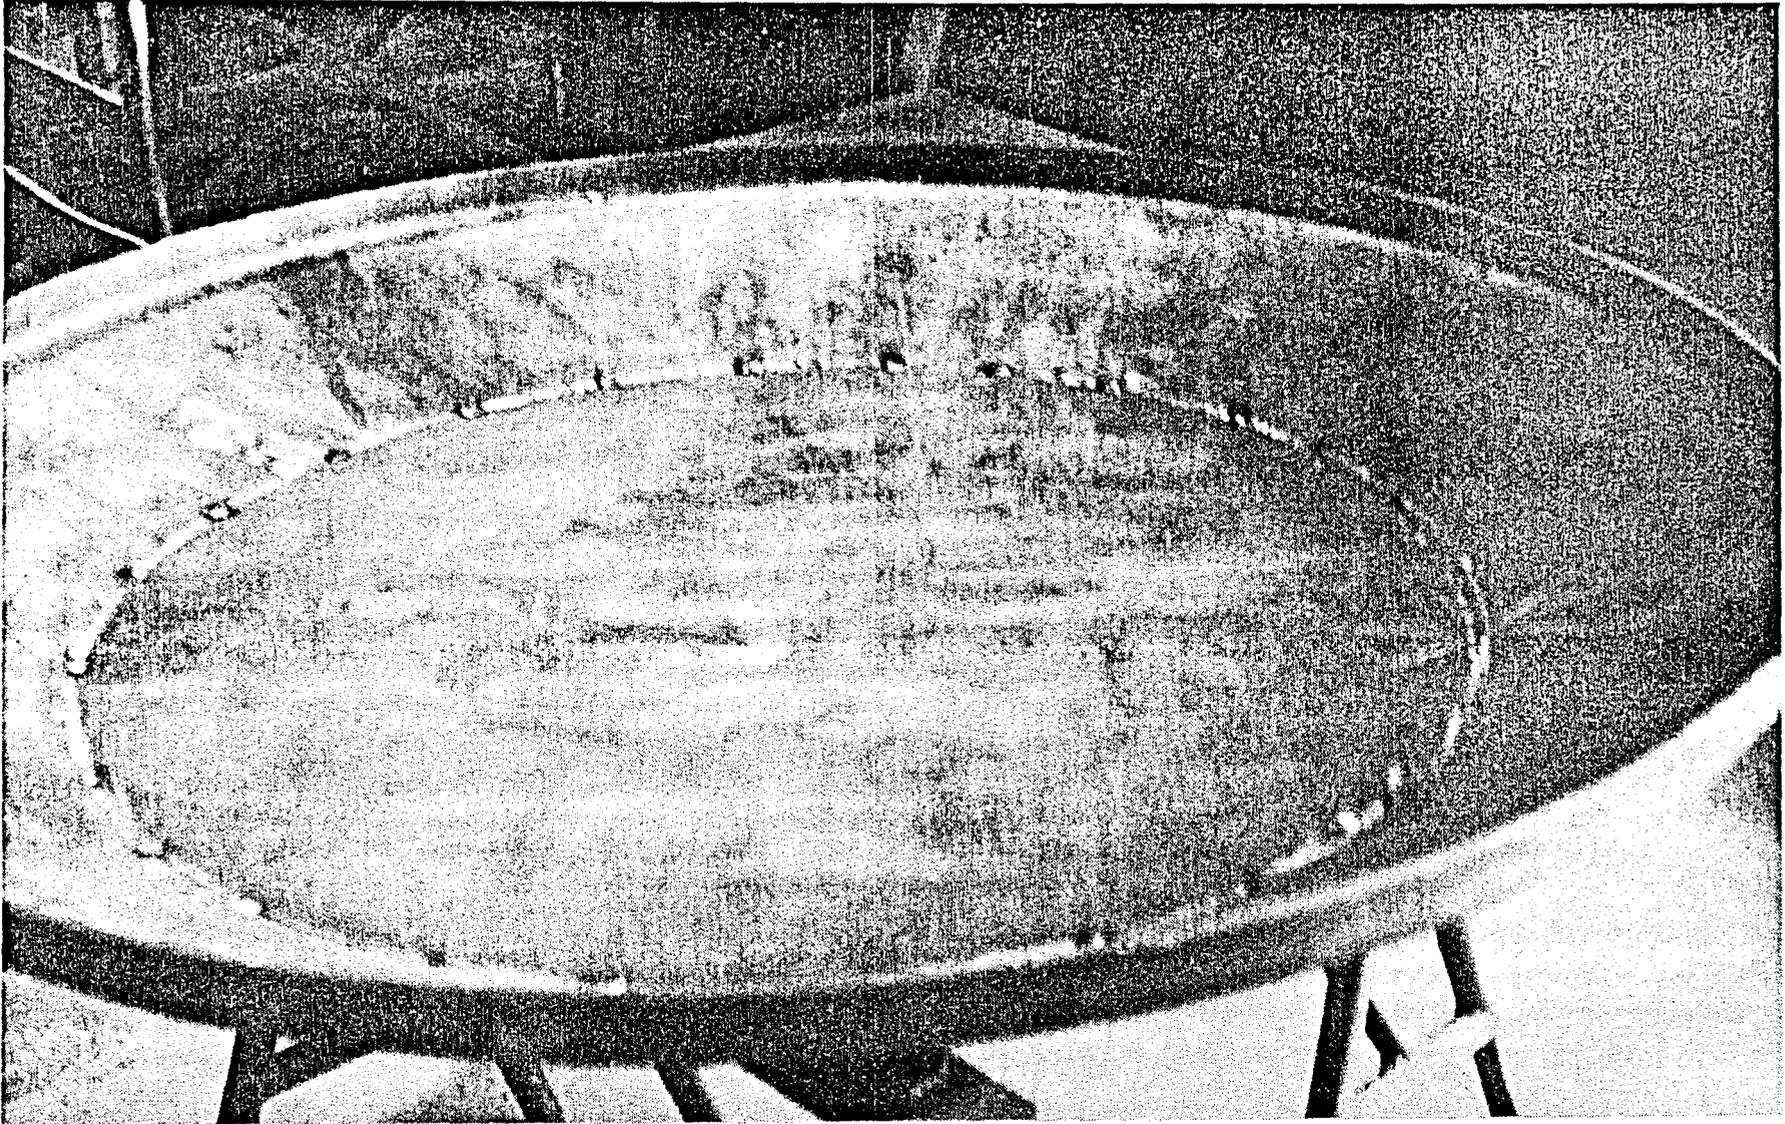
Saucer Skid Manufacture, Flat Bottom Skid--Welded Bottom.
